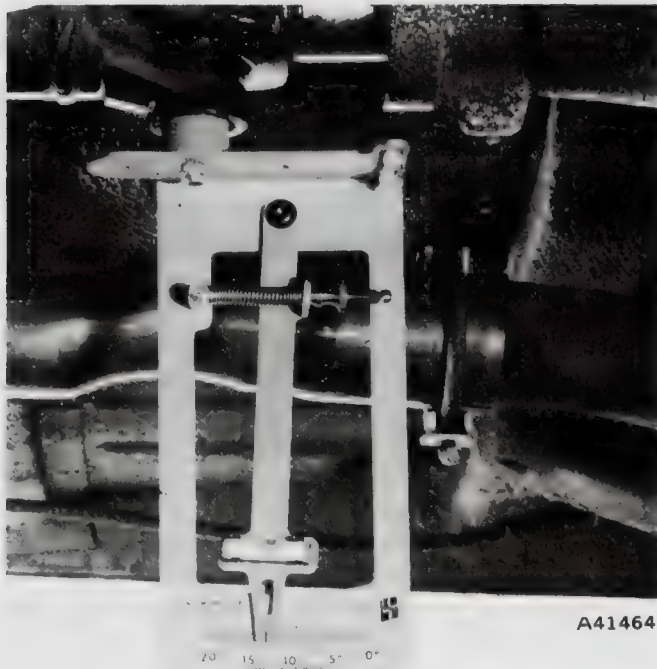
D-10 Inclinator Installed at Propeller Shaft Front Yoke
